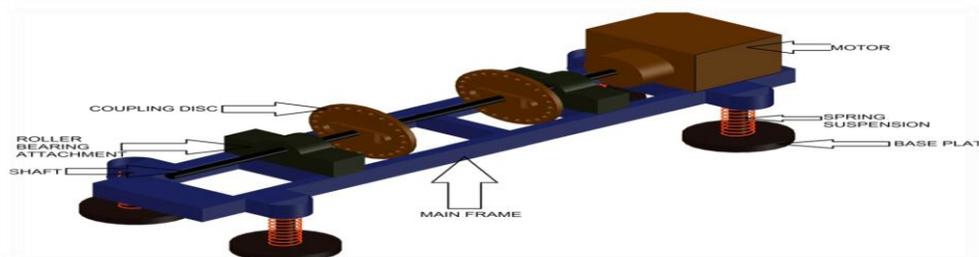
CAD model of experimental setup. A vibration analyzer is attached on the roller bearing attachment on the free end of the rotating shaft
